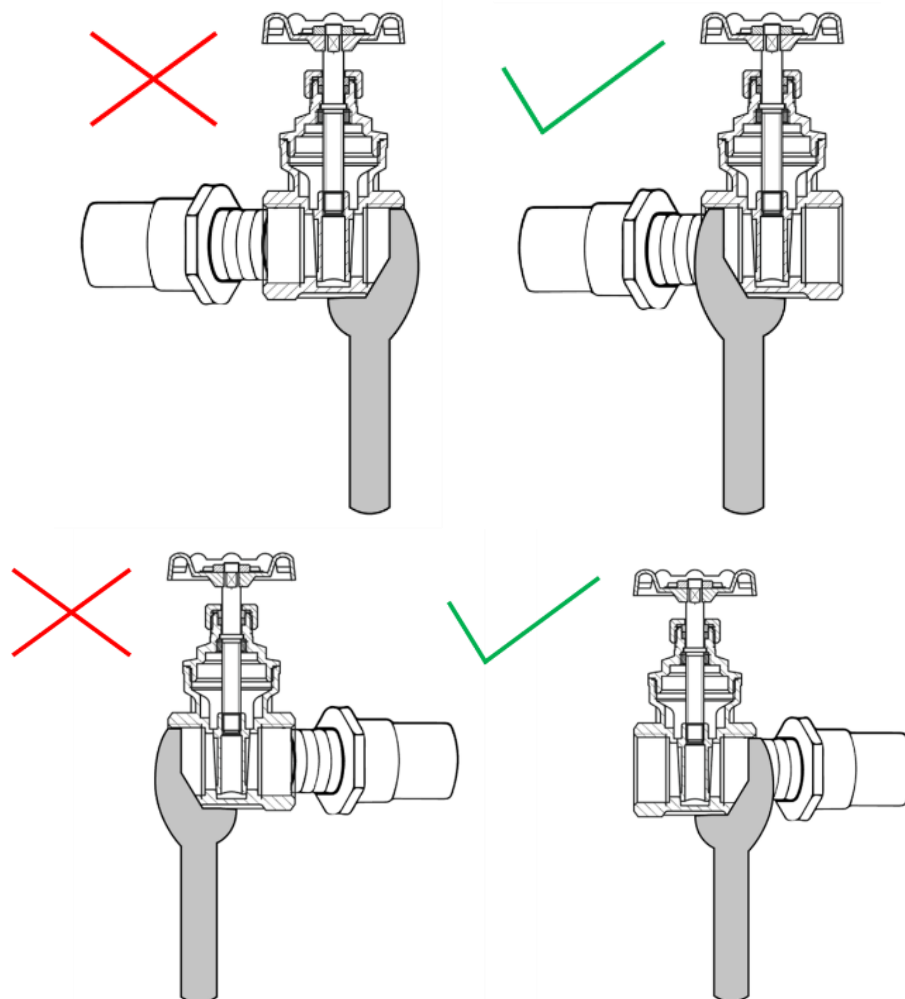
Proper use of wrench or spanner during installation of threaded valves.
